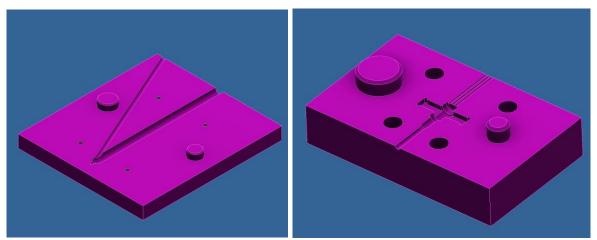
Altered Casting Moulds Based on Tip Casting Trials
